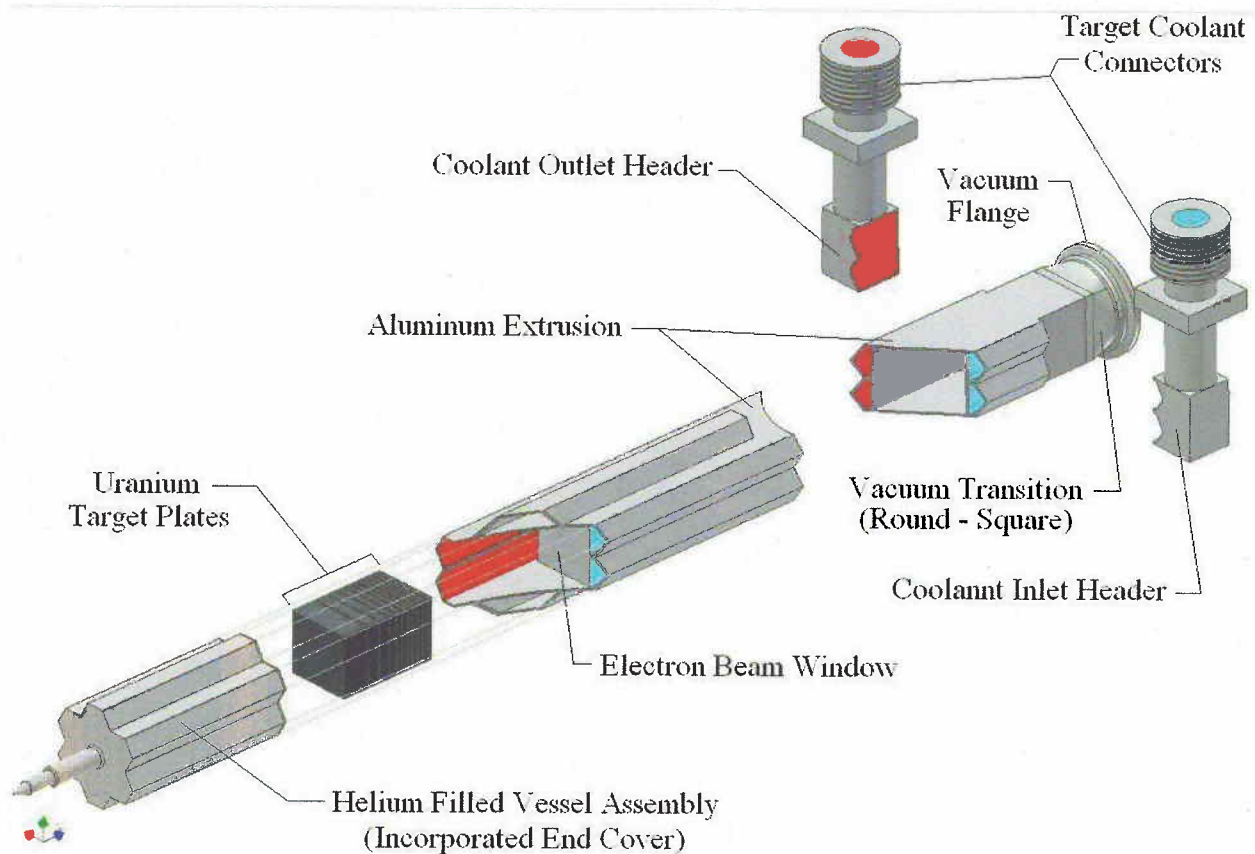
Exploded target assembly cutaway for an electron beam with square cross section.
